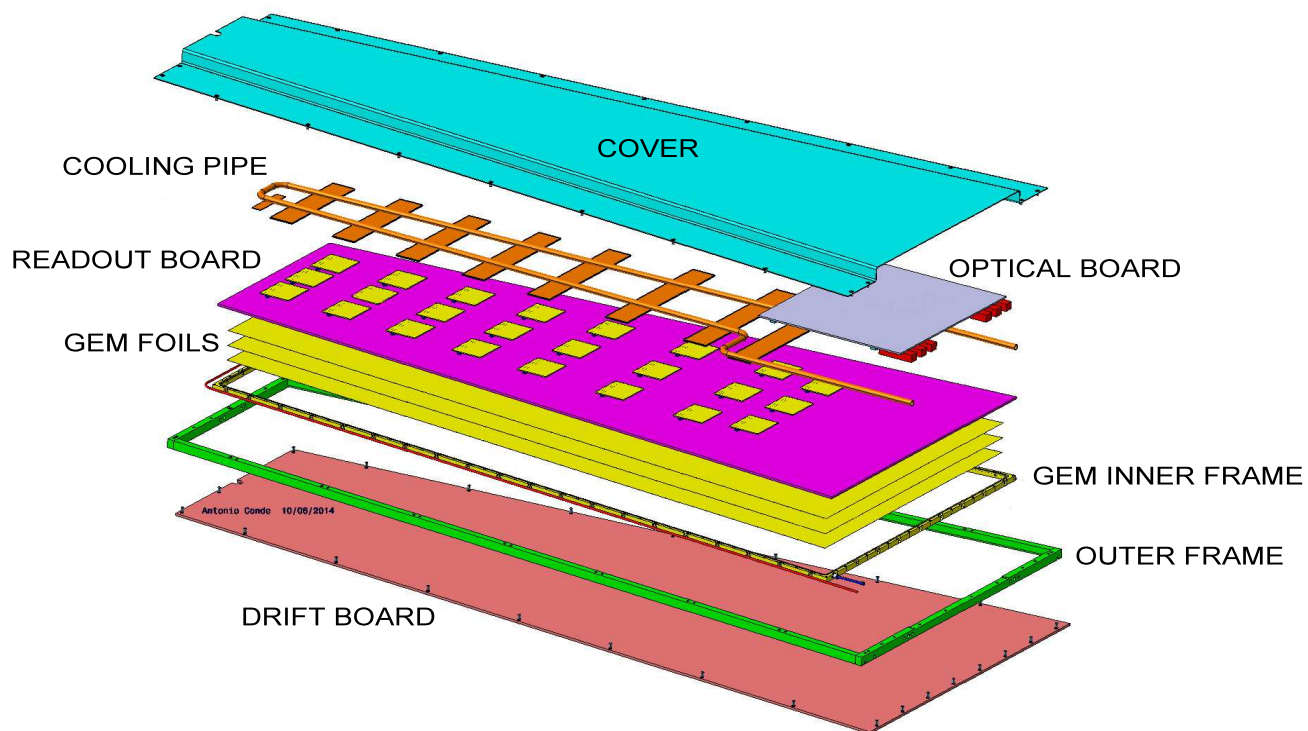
Exploded view of the mechanical design of a single GE1/1 chamber.
